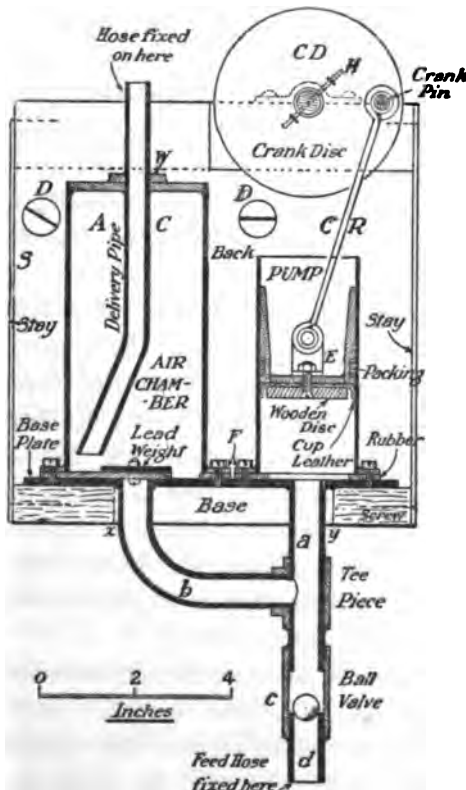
Force pump and air chamber and valves in section, on stand.
